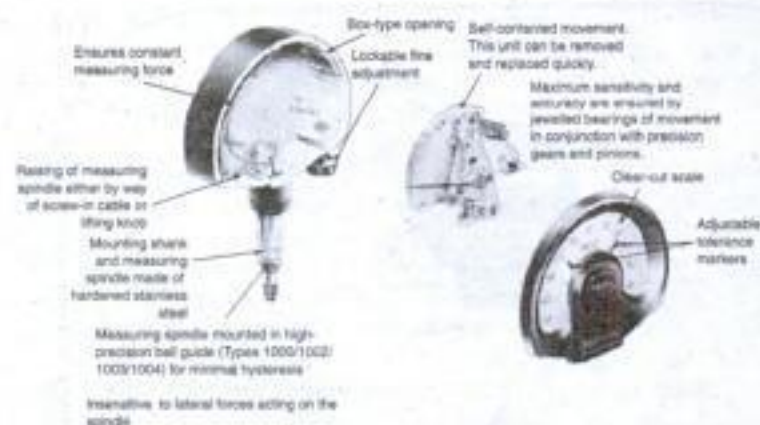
Exploded view of mechanical dial comparator with limit contacts
